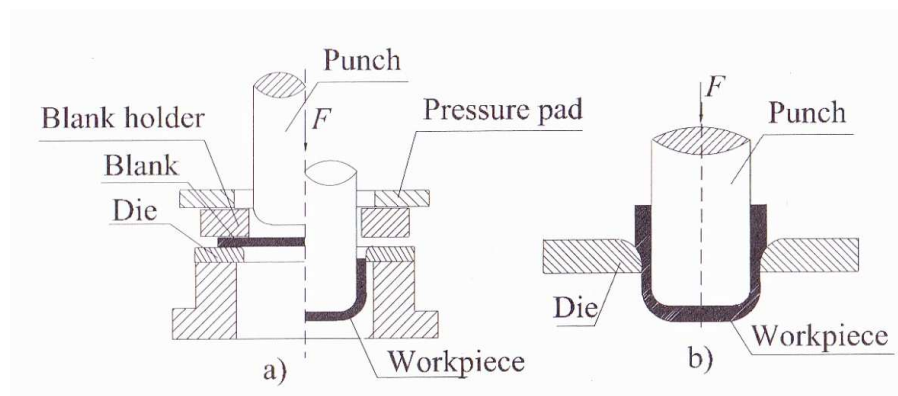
Schematic illustration of deep drawing process: (a) Pure Bending; (b) Ironing
